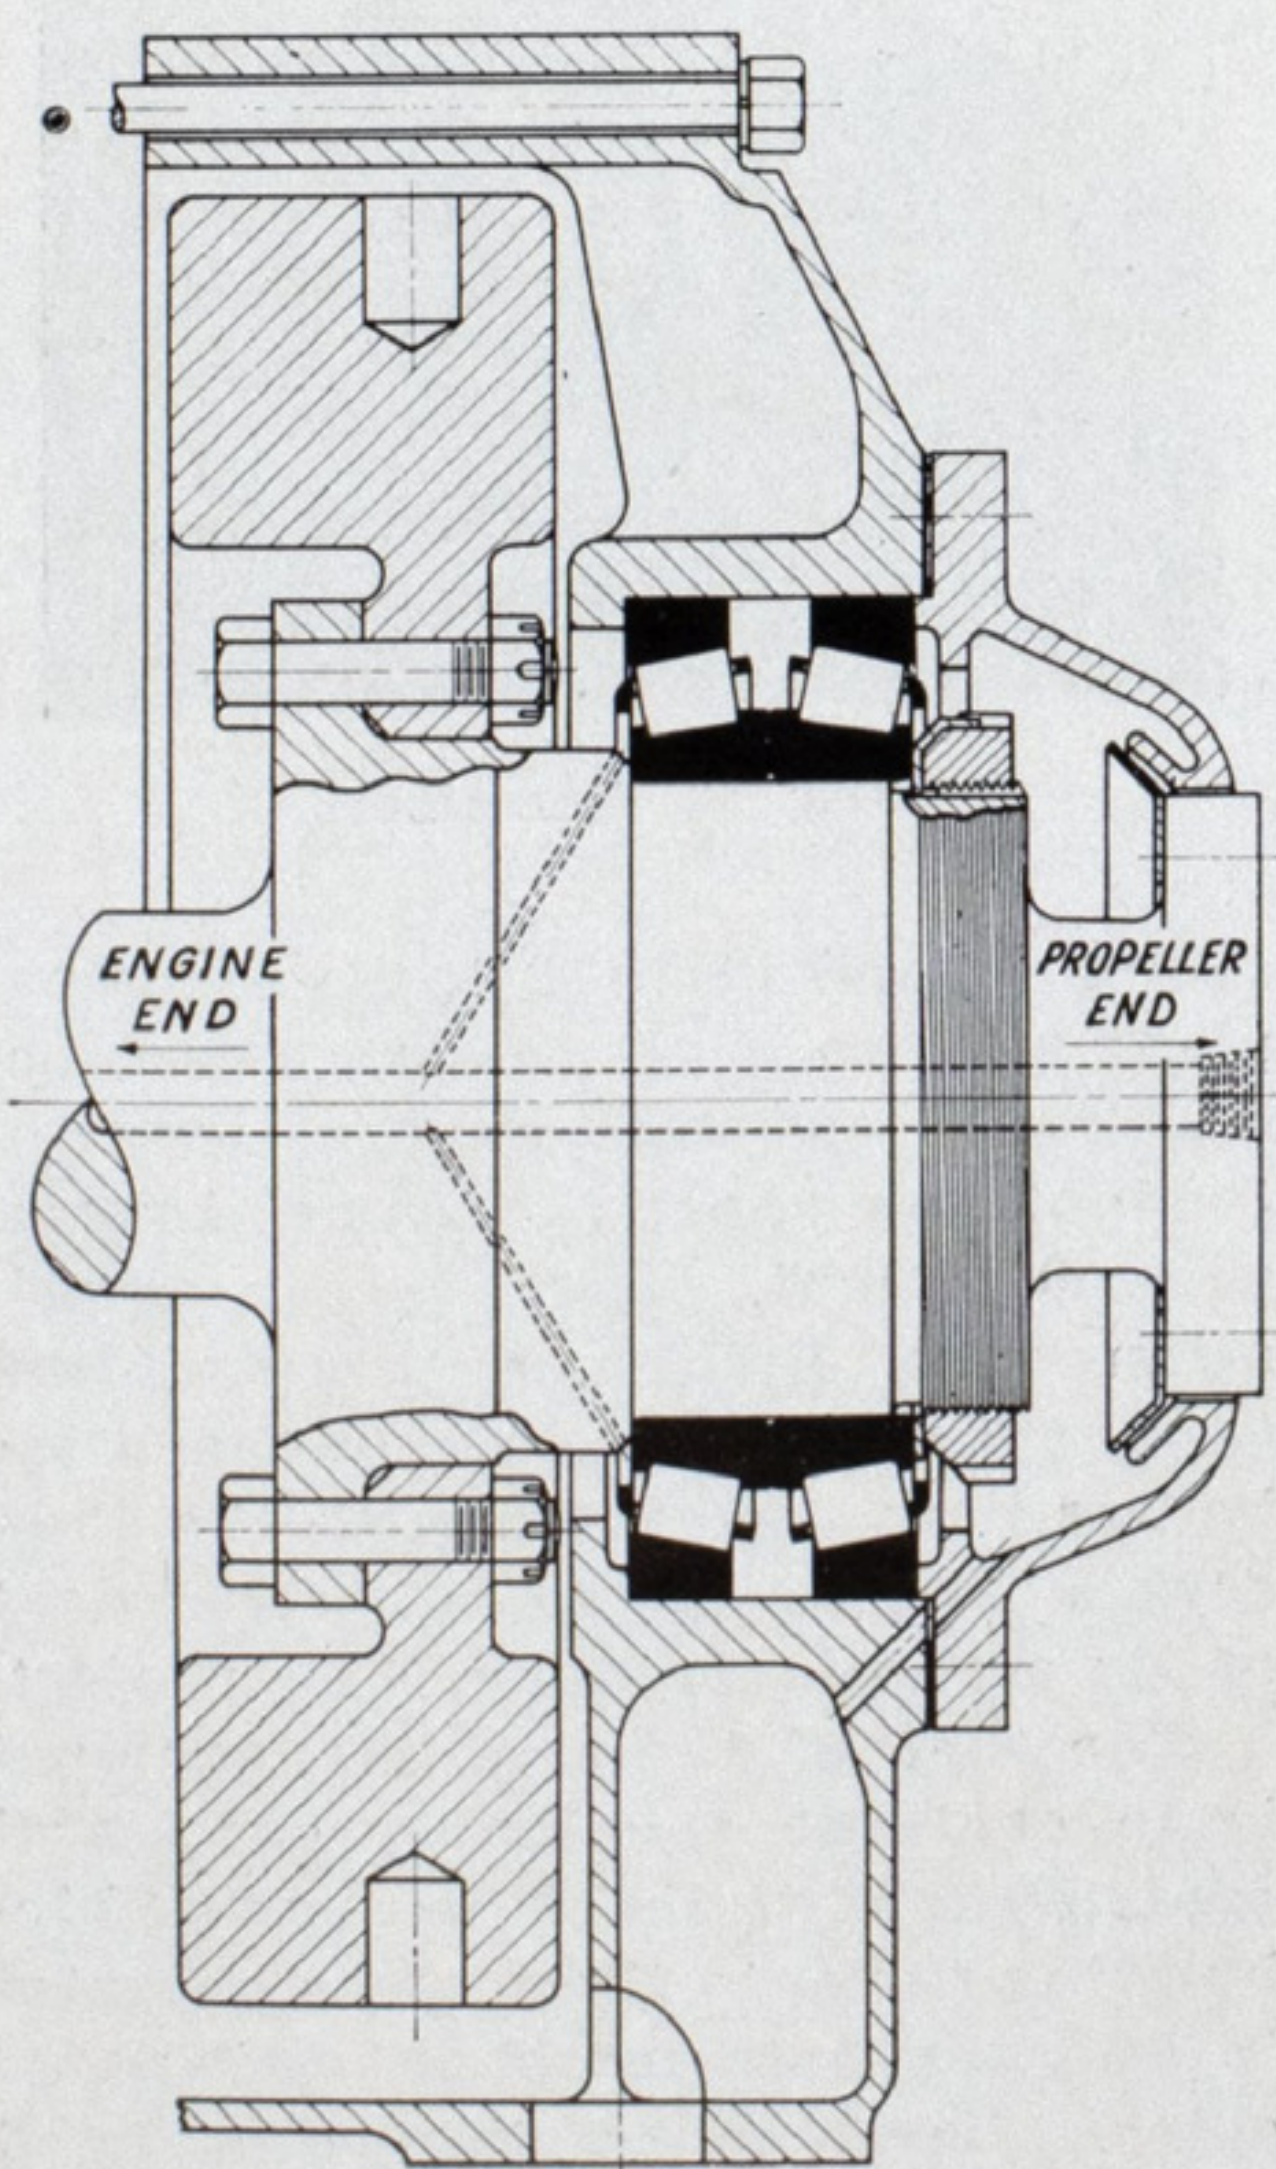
Standard design for roller bearing thrust unit at aft end of engine crank shaft
